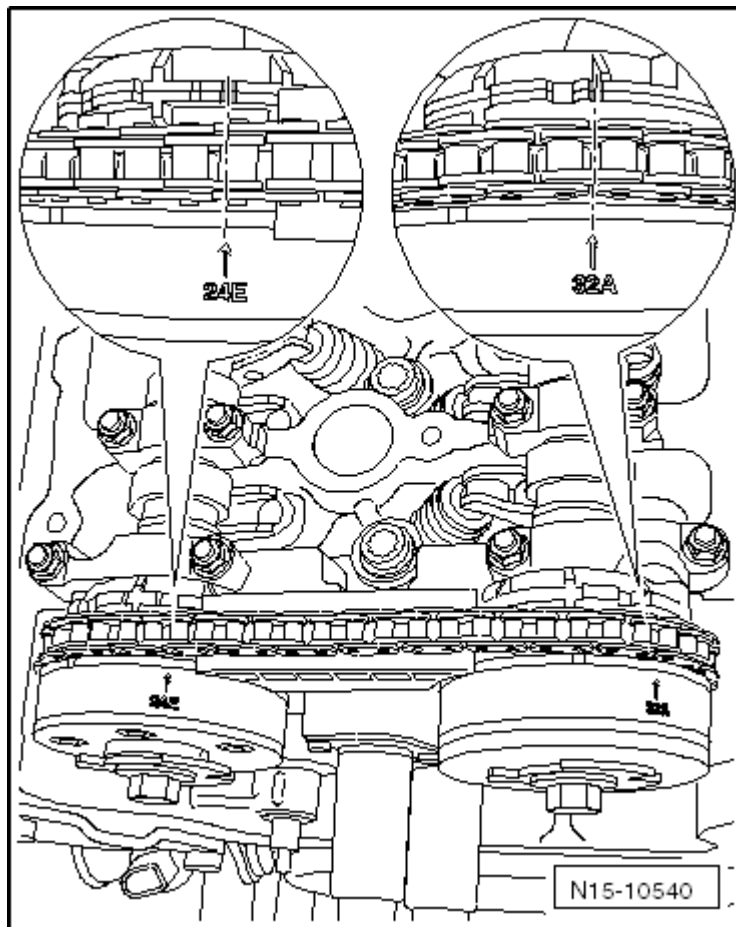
Verifying Installation Marks Of Camshaft Adjuster With Marks On Control Housing
